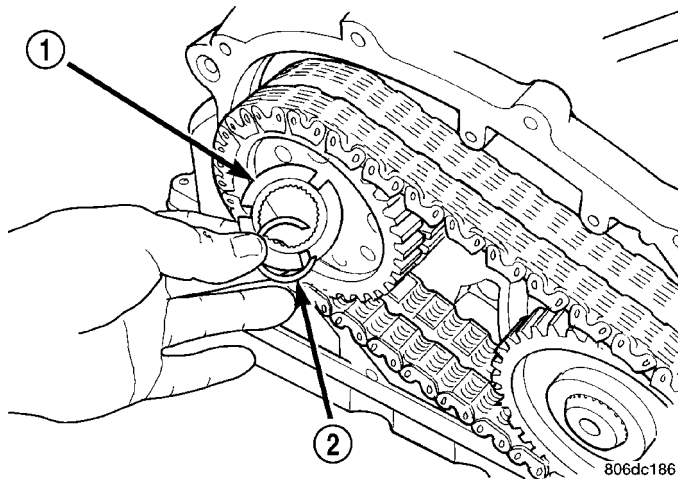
Remove Output Shaft Sprocket Snap Ring and Wave Washer
